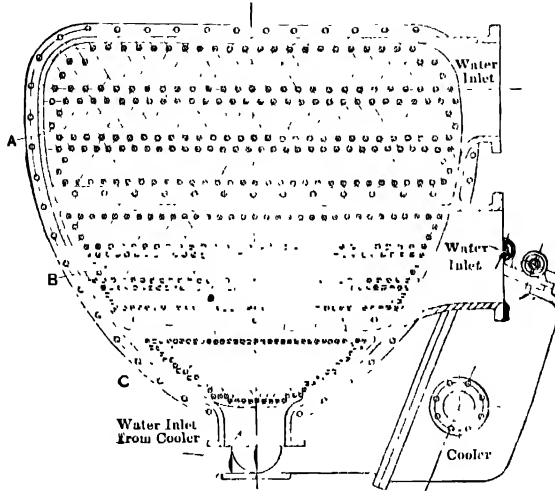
Tube Sheet — Ingersoll-Rand Condenser.
